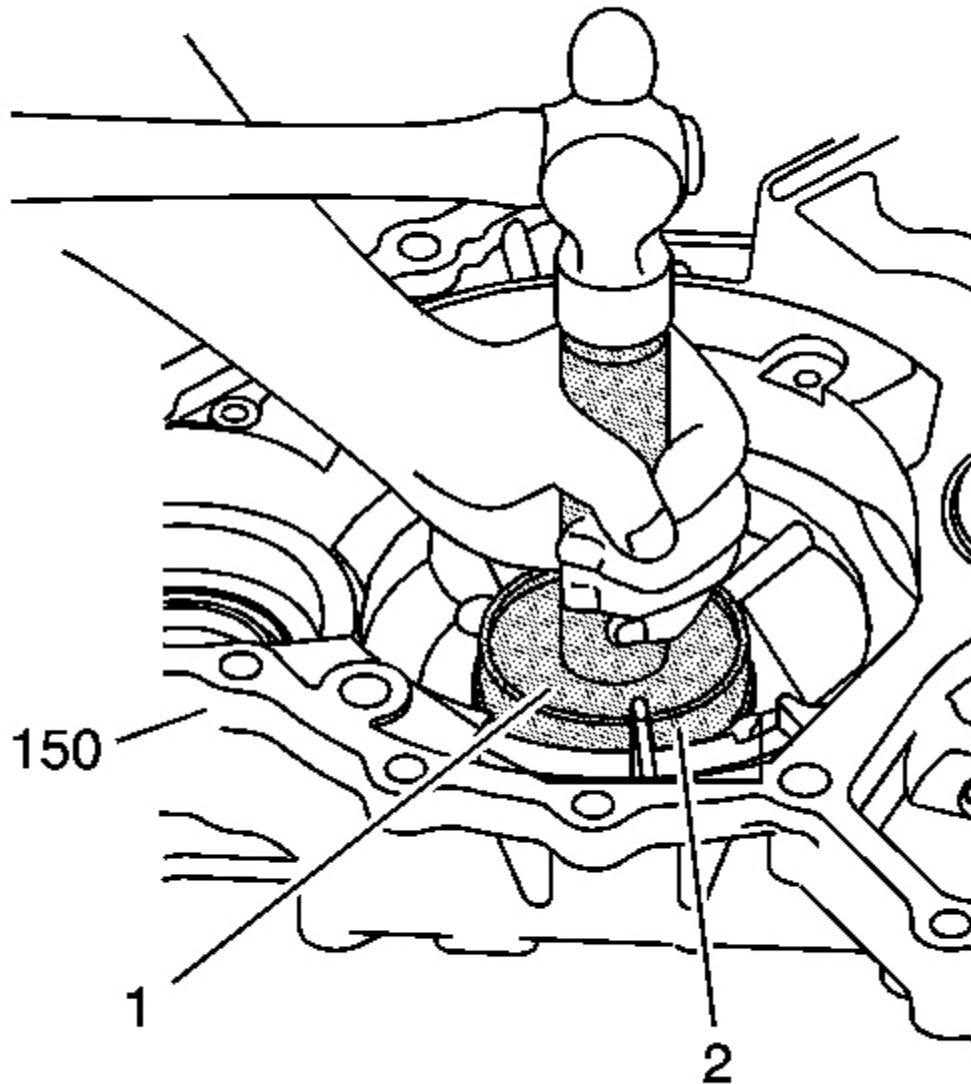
Installing The 80 mm Front Differential Tapered Front Roller Bearing Race Using DT
